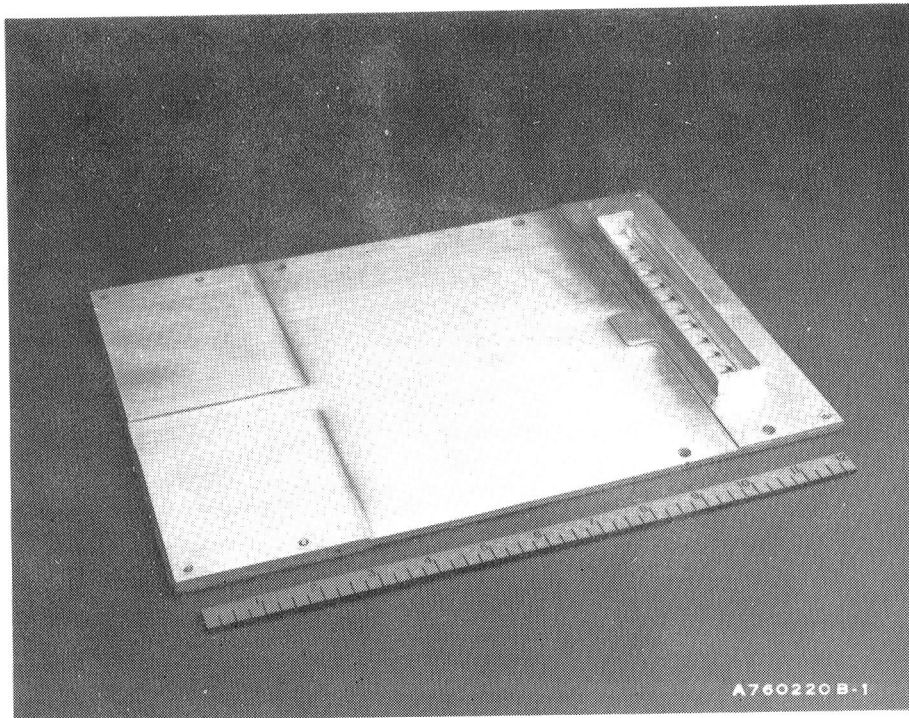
EPISTS Panel after Brazing. Inner Face Sheet Cut-Outs Visible beneath Manifold Base
